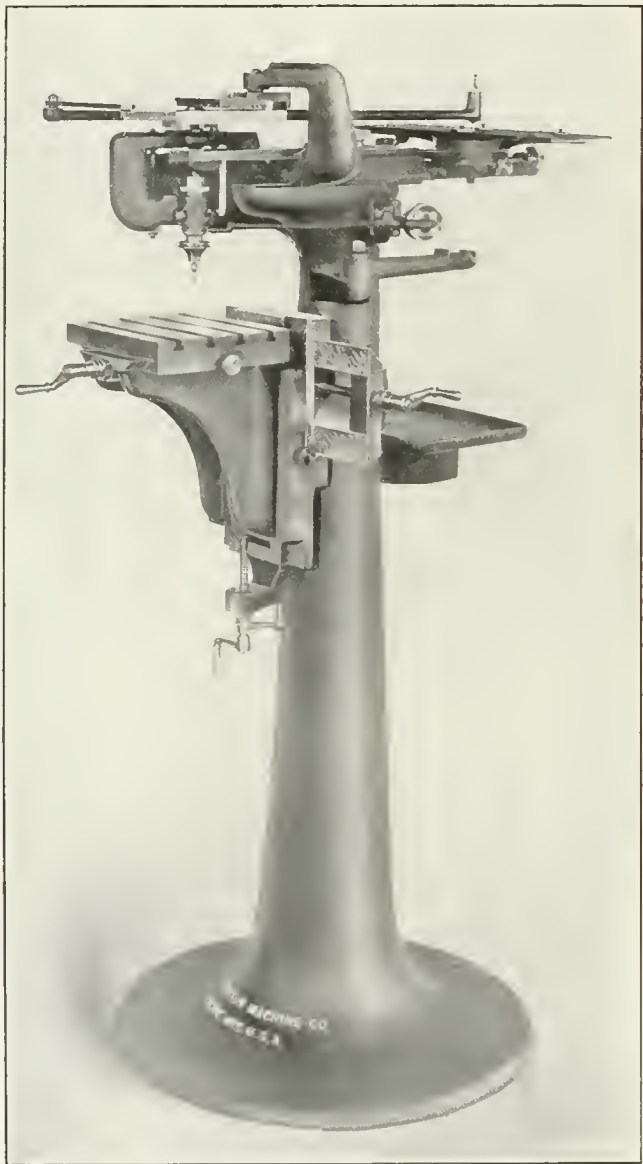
Gorton Engraving Machine adapted to engraving on Rounded Surfaces
